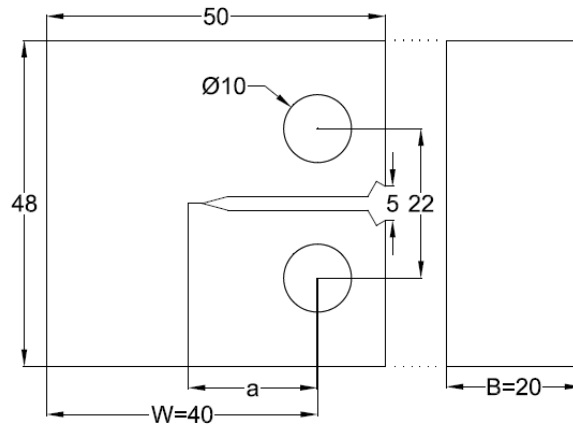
CT specimen used during testing, with its dimensions in mm.
